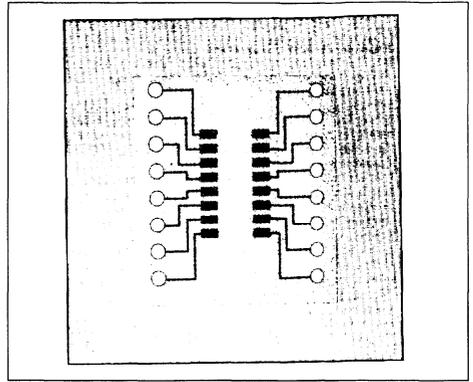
Figure K : Test Board Lay-out for SO Packages (3000 mils body width) Board size is : 38 x 43mm².
